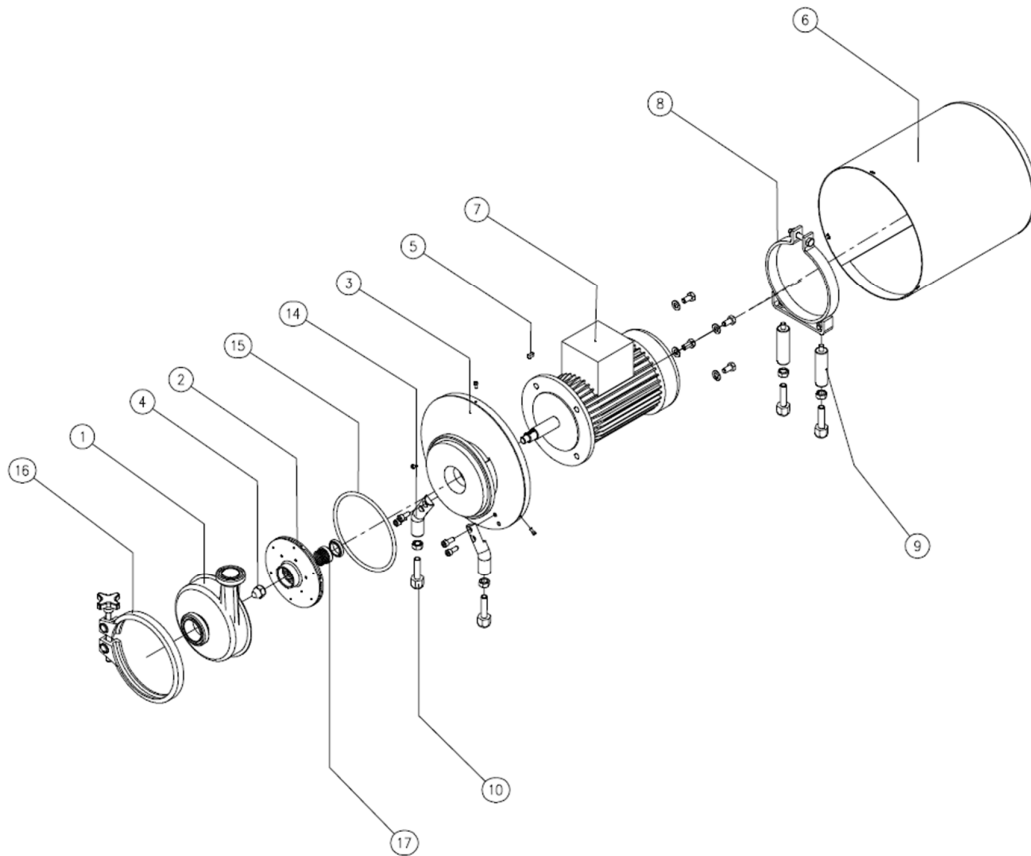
Exploded view of T- Execution pump (Single Mechanical seal)
